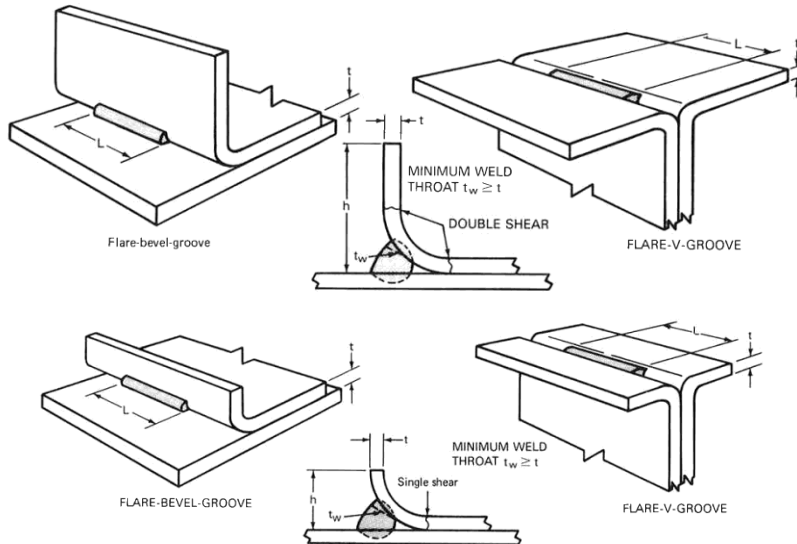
B — Single Shear in Flare-Groove Welds (See 2.2.5(2))
